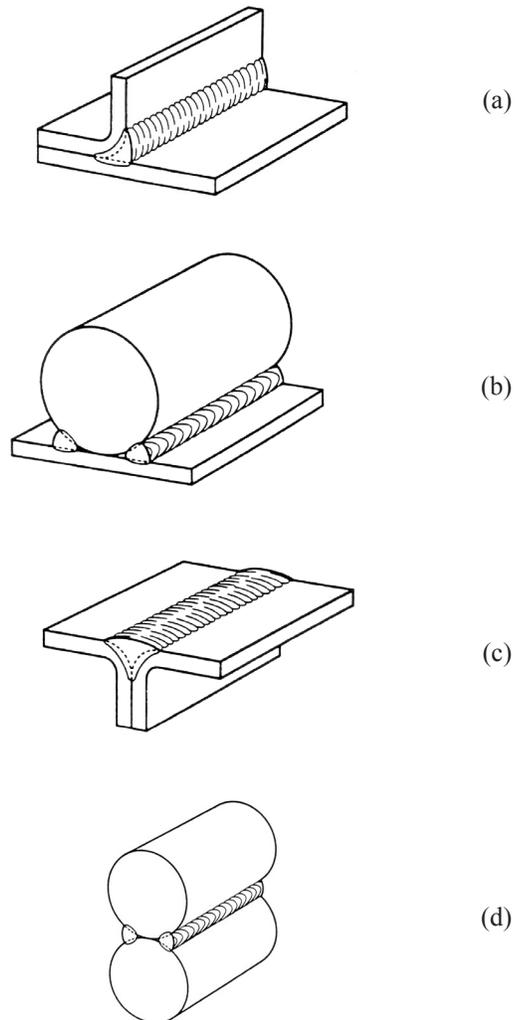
Flare Groove Welds (CSA, 1989; 2003), (a) Flare Bevel Groove Weld (HSS & Plate), (b) Flare Bevel Groove Weld (Round Bar & Plate), (c) Flare-V Groove Weld (Two HSS), (d) Flare-V Groove Weld (Two Round Bars).
